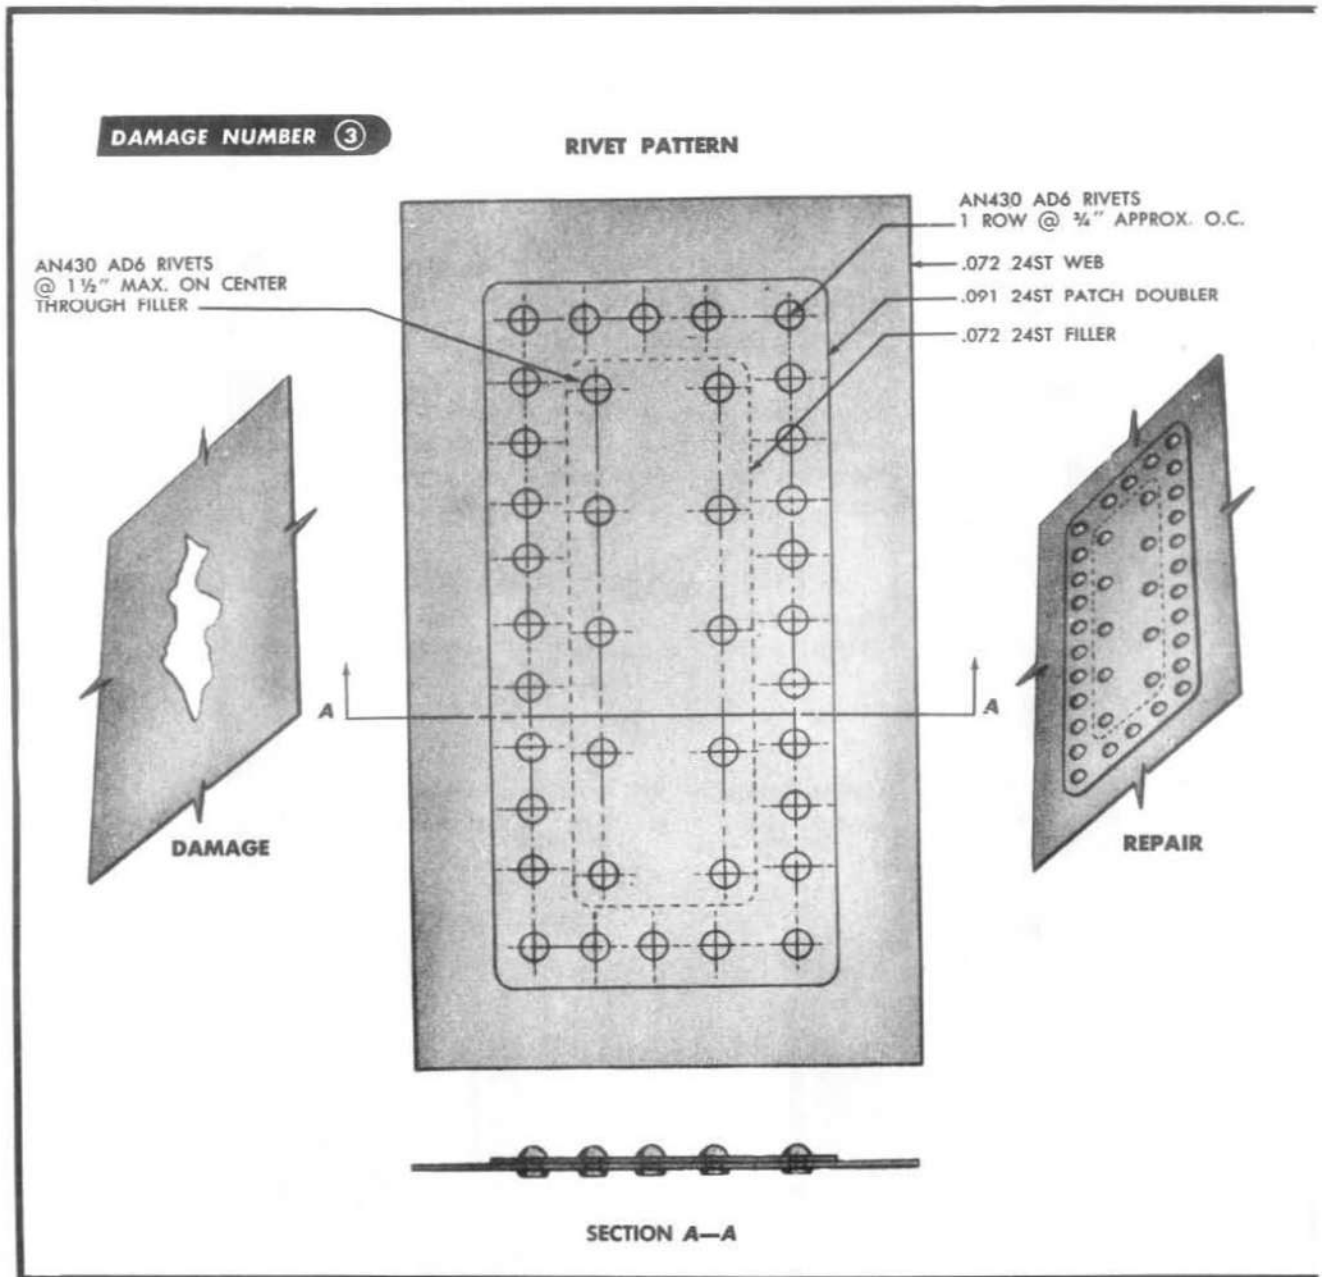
Repair of Partial Damage to Channel of Station O Frame Assembly
